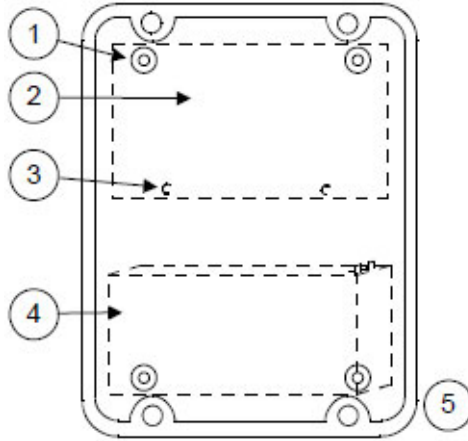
Mounting the EA120 in the AE101 Enclosure
